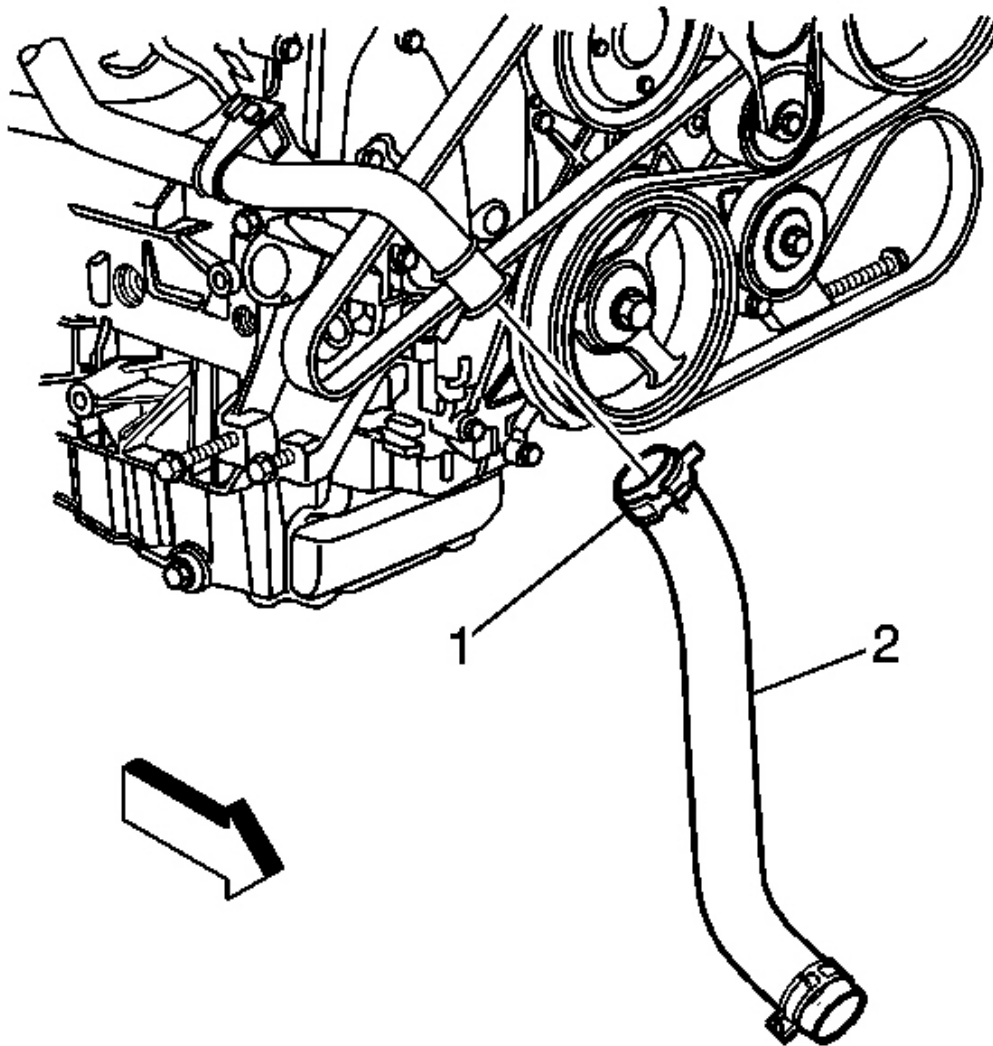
Radiator Outlet Hose & Clamp At Engine
